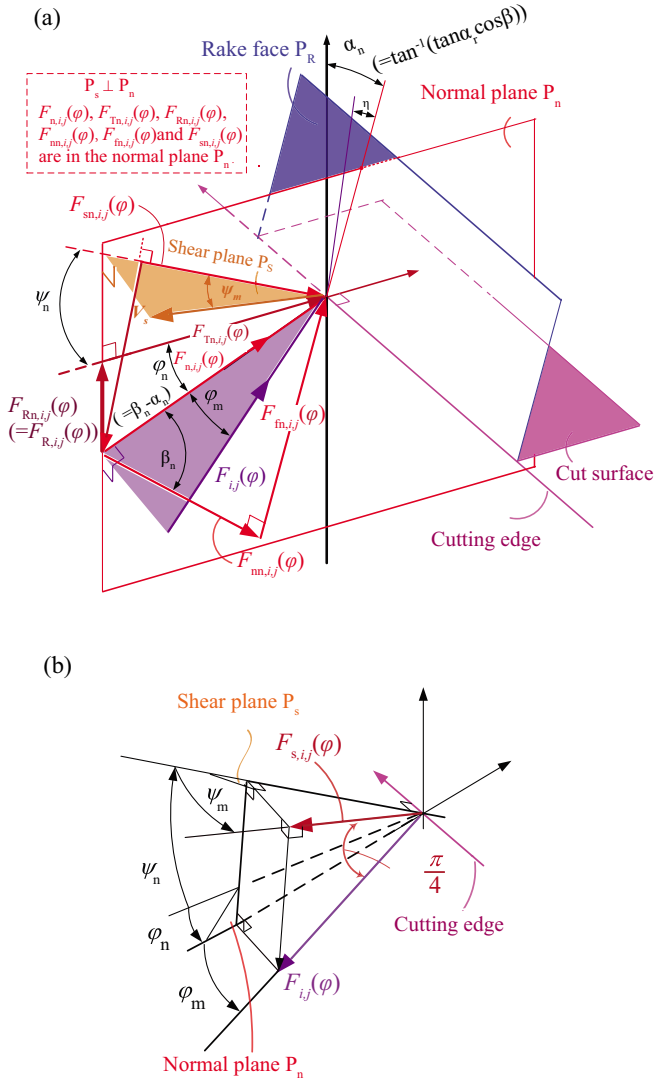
Cutting forces related to the j th axial disk element of the i th flute; a) General relationship in equivalent oblique cutting; b) Relative geometrical diagram. For a color version of this figure, see www.iste.co.uk/zhang/milling.zip
